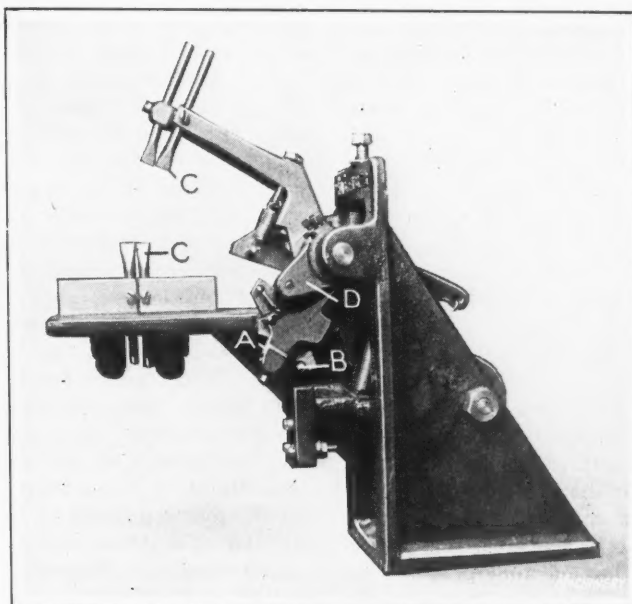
Electric Butt-welding Machine for welding Filament to Lead Wires
